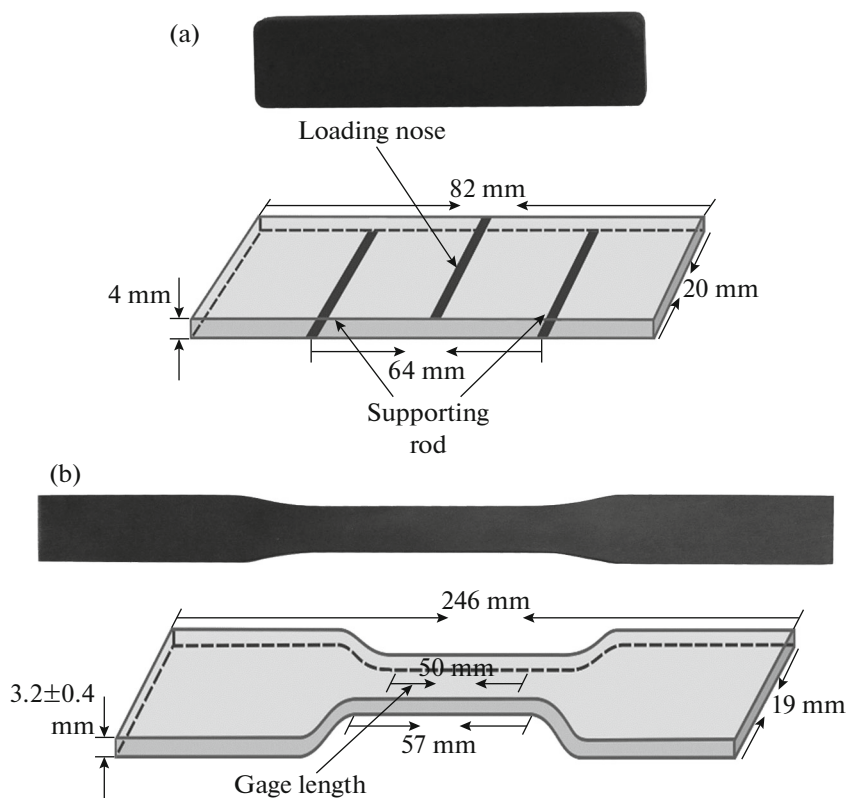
As prepared (a) flexural and (b) tensile specimens and the standard dimension of them.
